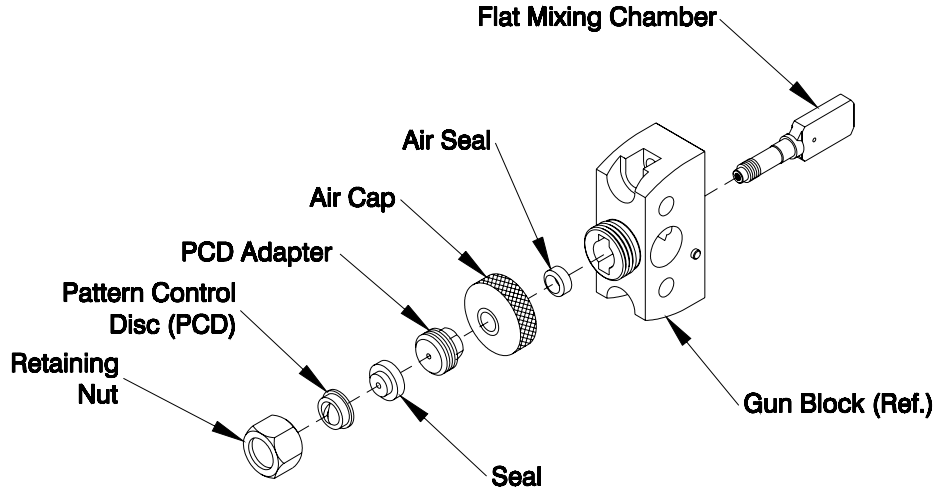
Pattern Control Disc (PCD) Fan Spray Assembly, Exploded View
